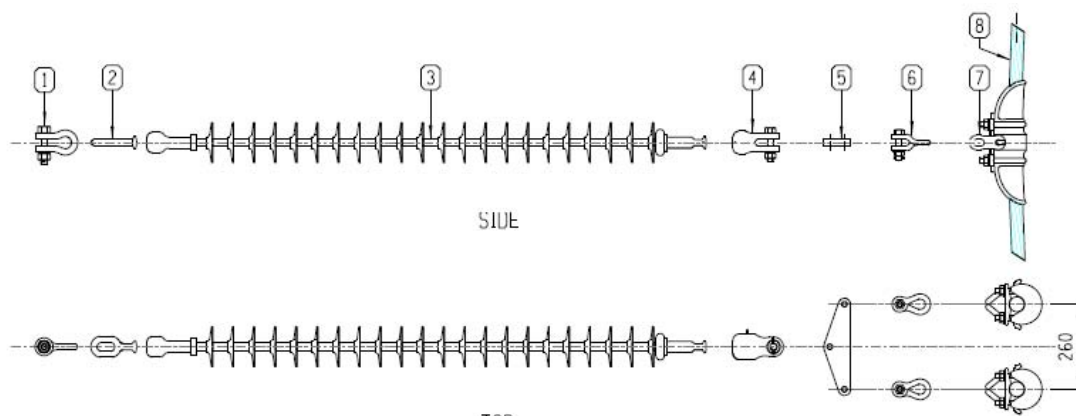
Phase Conductor Single “I-String A” Suspension Assembly for Single “Conductor”
